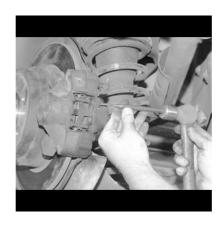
A light tap with a hammer will ensure that the pins are seated
